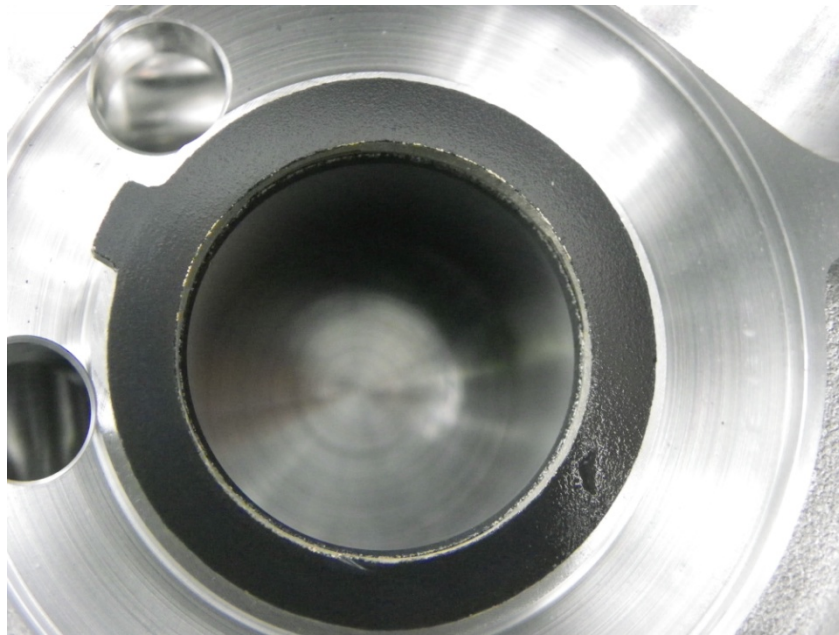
AF8646 ATJ/JP-8 Blend, Rear Pump Body Camshaft Bushing
